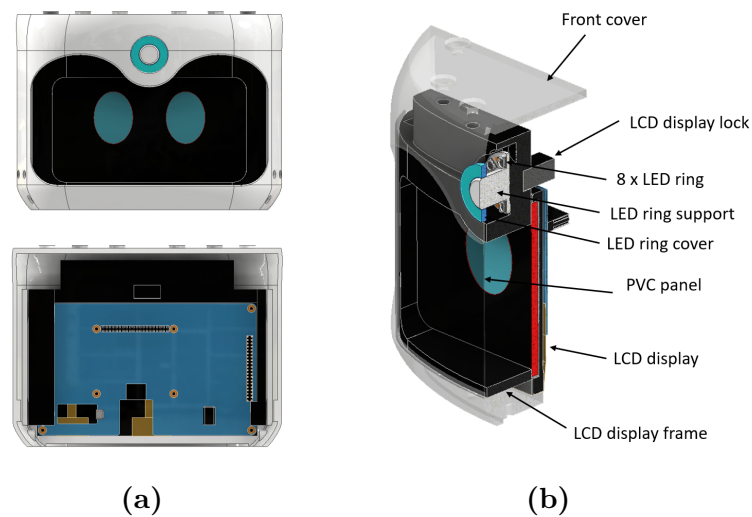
Details of the head front panel: (a) Front and back views, (b) Cut view.
